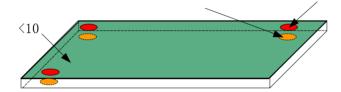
Both sides of a double sided PCB should generally be consistent with each other.
